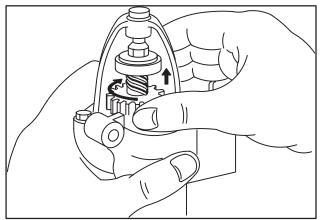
CHECKING STARTER MOTOR DRIVE
